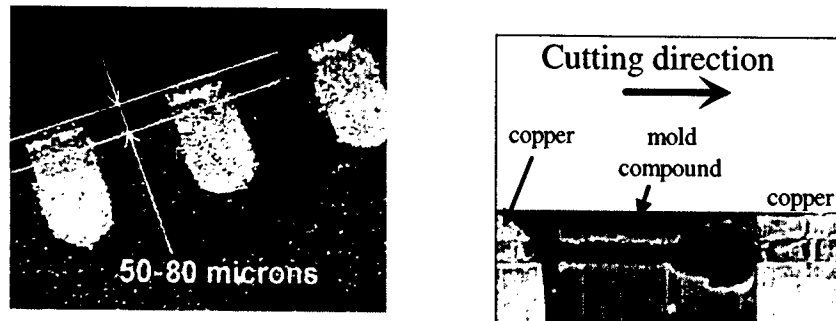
Typical backside view of a singulated copper based chip scale package (left), backside view of a sample where the mold compound was partially removed from cutting from the bottom (right).
